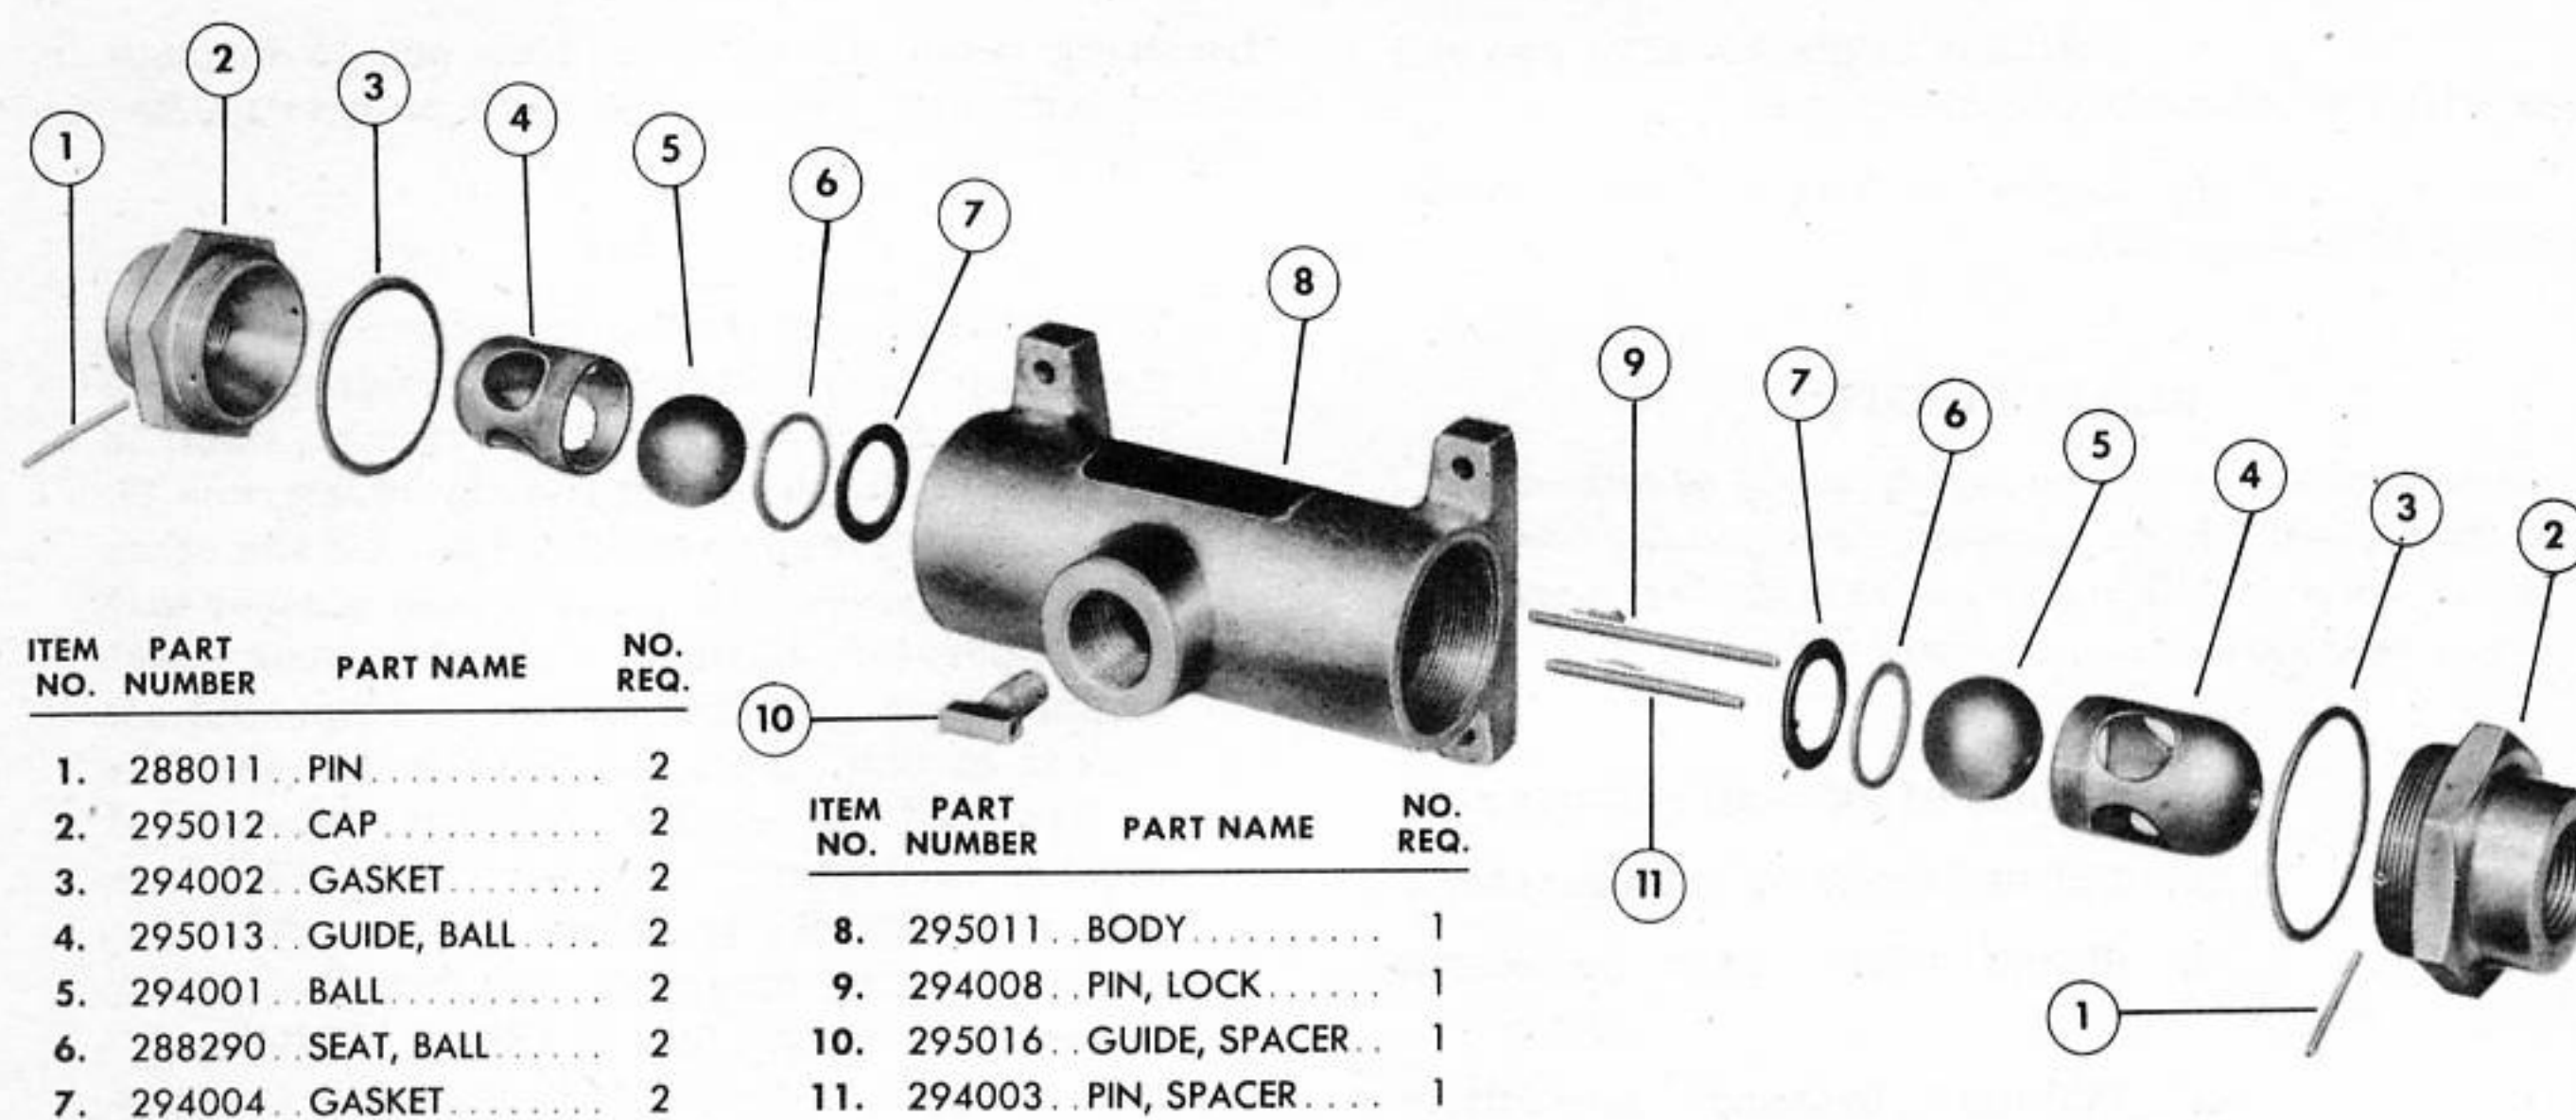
FUEL BALL CHECK VALVE - EXPLODED VIEW
